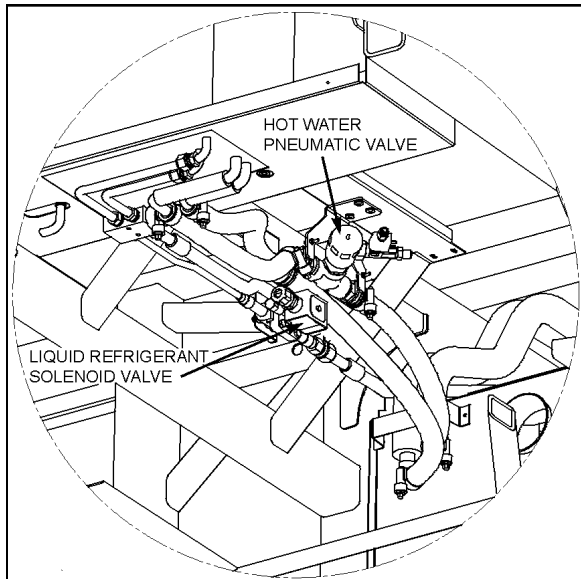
DRIVER'S EVAPORATOR LIQUID SOLENOID VALVE
